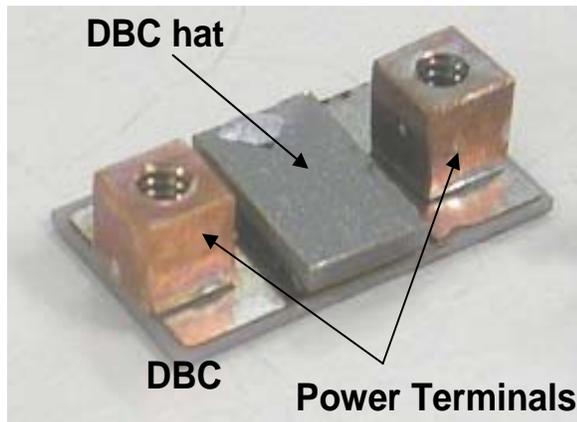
Flip Chip power package containing a 75A, 1200V SiC diode, shown without a metal base plate.
